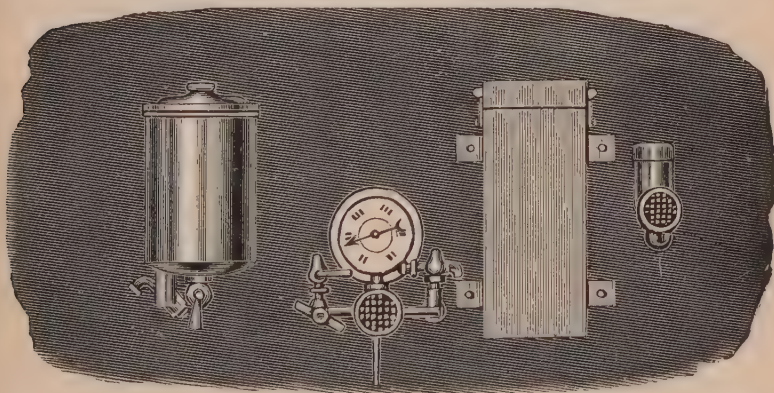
Winton six dash assembly, showing from left to right the auxiliary gasoline tank, the shut off, push button and gauge of self-starter, the spark coil and oil sight feed.
